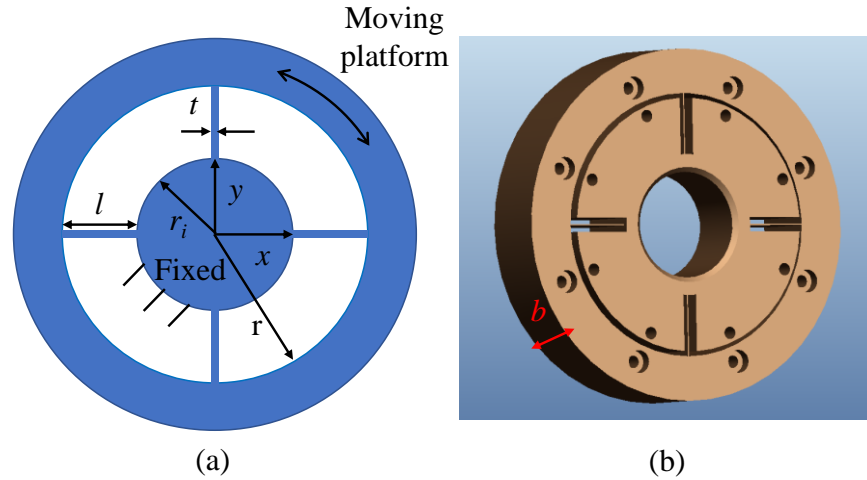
(a) Schematic, and (b) CAD drawing of symmetric cartwheel flexure (SCF) design [150].
